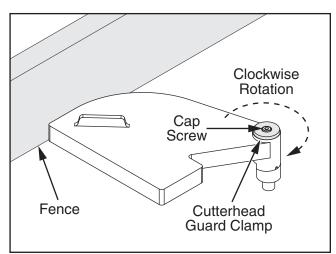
Rotating cutterhead guard clamp (tables removed for clarity).
